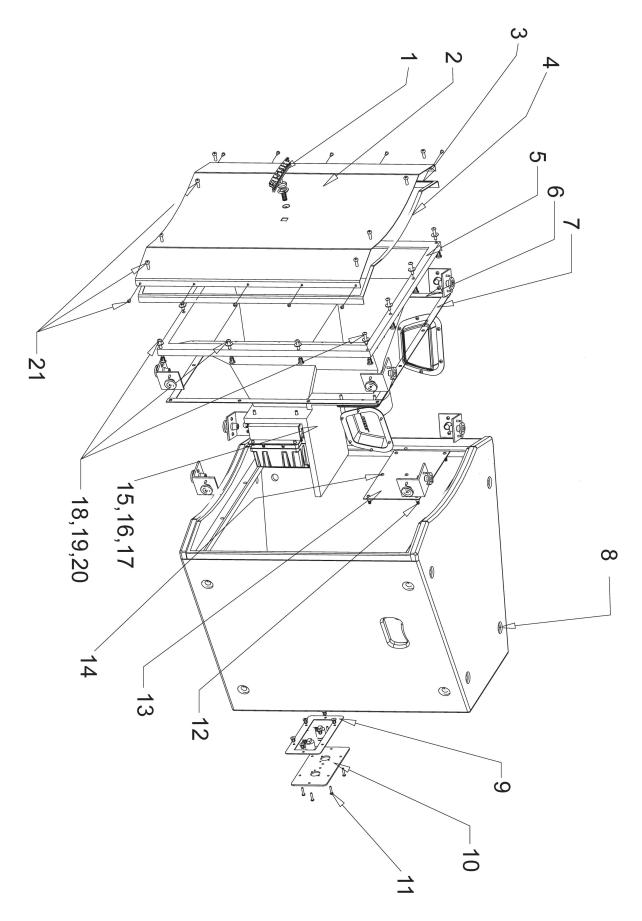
Panaray LT 6400 Loudspeaker Exploded View
